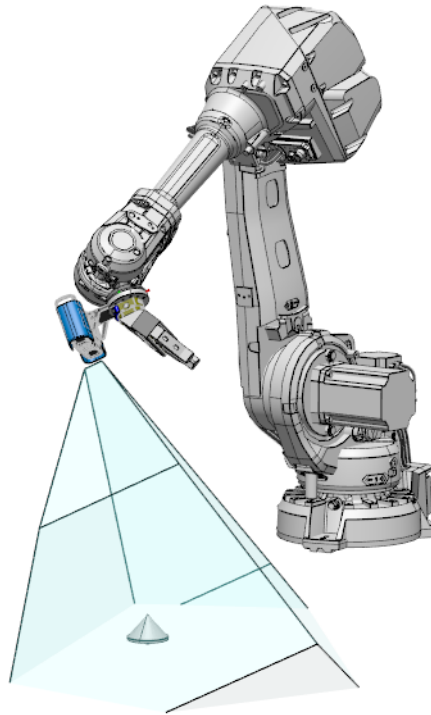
Robot mounted alignment, x-axis and y-axis rotation
